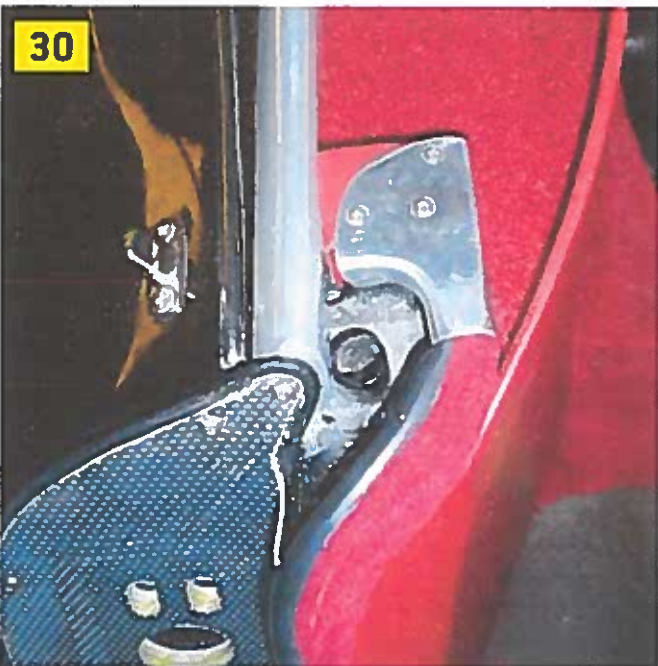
The top end of the seal is held with an aluminum trim plate, fastened with #4 Phillips raised-head wood screws. (A 3000 BT7 is shown.)
